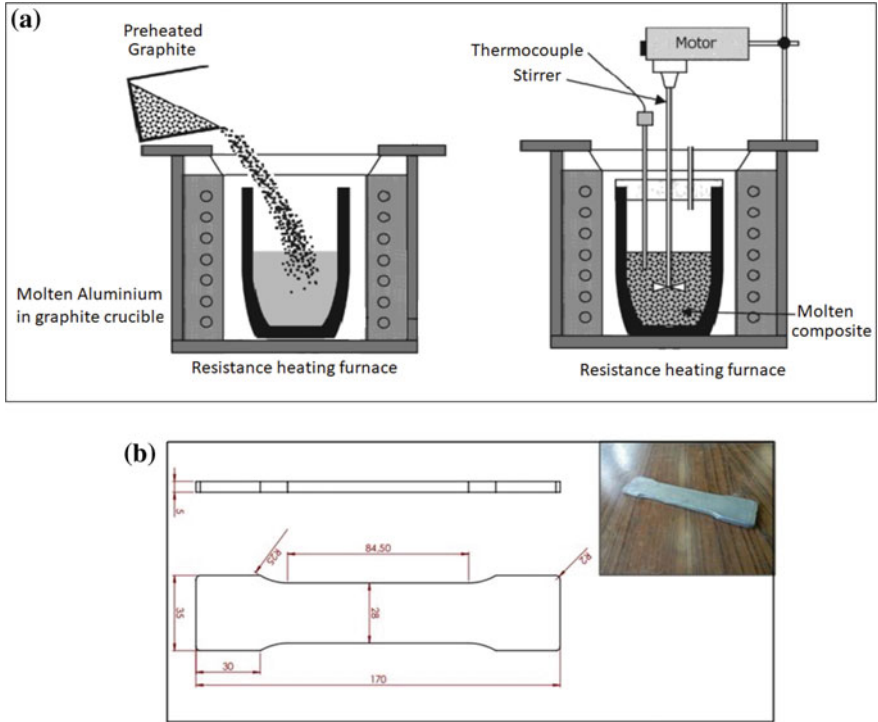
a Stir Casting setup b Tensile test specimen of composites
